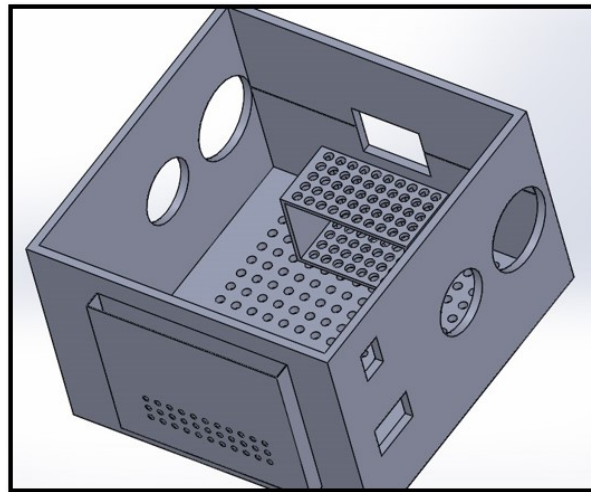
The top view of laser box designed in SOLIDWORKS.
